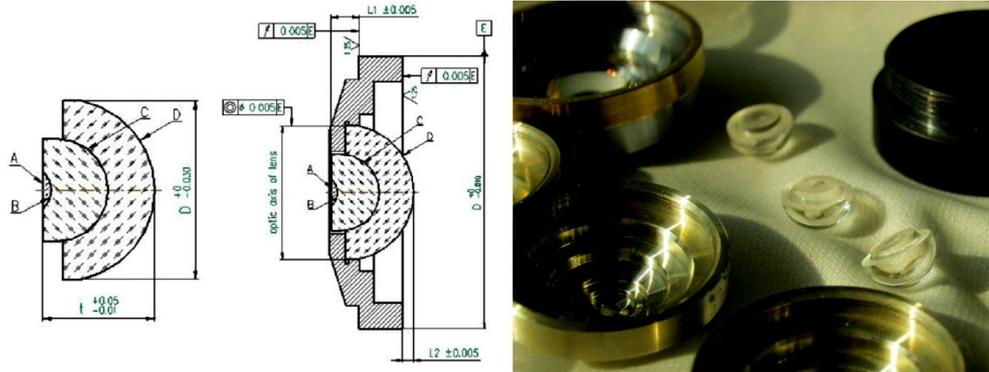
Three cemented lens of frontal component assembly drawing and picture.
